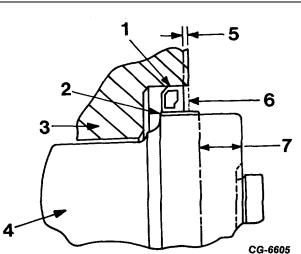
Sectional View Showing Proper Location of Wear Sleeve and Rear Oil Seal
